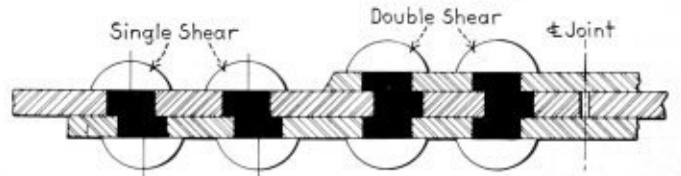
Failure of Double Butt Strap Joint by Rivet Shear; Failure (Sh)
